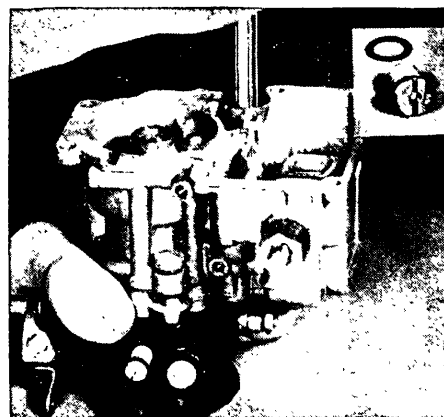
Remove pump by-pass jet and gasket. Scrap b th parts
